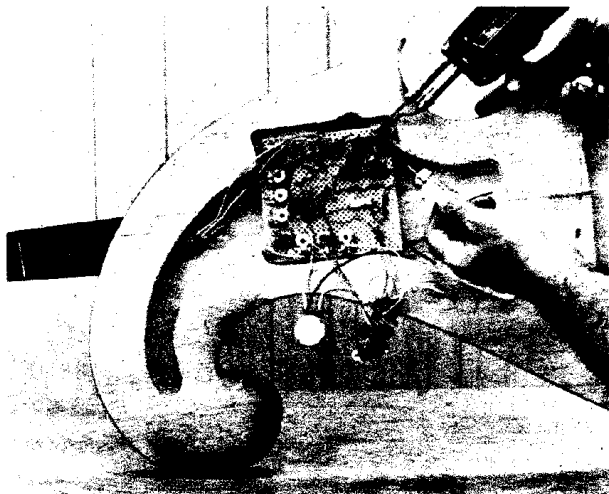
Circuit board is in upper part of our instrument's body. Note wires going up to neck to frets. Switches, R11 were mounted behind left hand.
